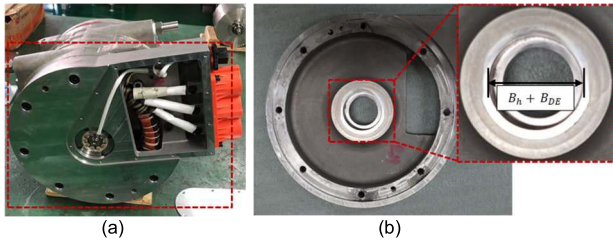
Machining for application of DEF condition, (a) base motor, (b) Machining of the bearing pocket in the rear cover.
